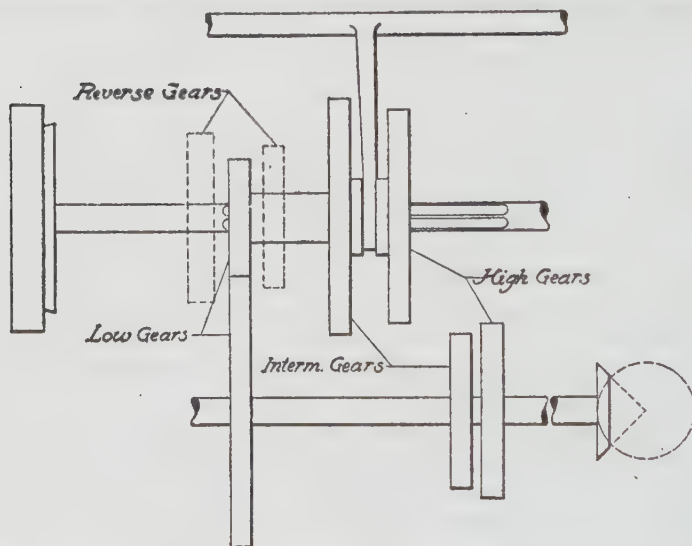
SKETCH OF LEVASSOR'S SLIDING CHANGE SPEED GEAR
